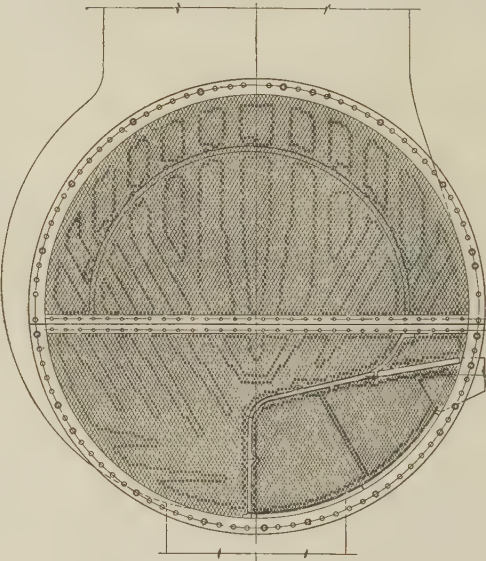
INLET END TUBE SHEET LAYOUT FOR 30,000-SQ. FT. CONDENSER. (NOTE QUESTION MARK Baffle FOR GUIDING WATER FROM AIR COOLER TUBE SURFACE TO OUTSIDE RING OF TUBES IN SECOND PASS)
